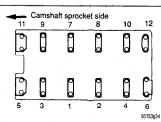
Camshaft bearing cap tightening sequence—1.6L and 2.0L DOHC engines
